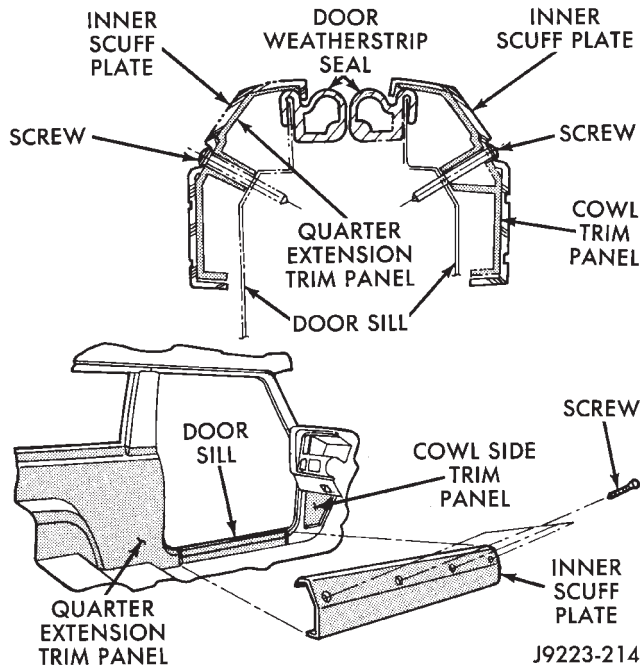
Interior Trim Panels/Mouldings/Scuff Plate—XJ 4-Door Vehicles
